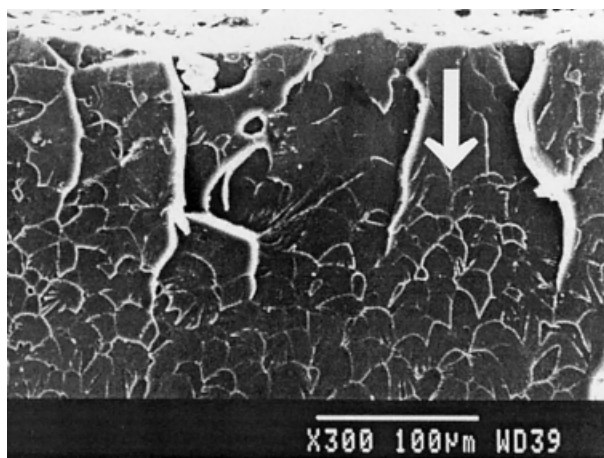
Fracture surface of SiX15. Cracks propagate from the upper right-hand corner to the bottom left-hand corner.
